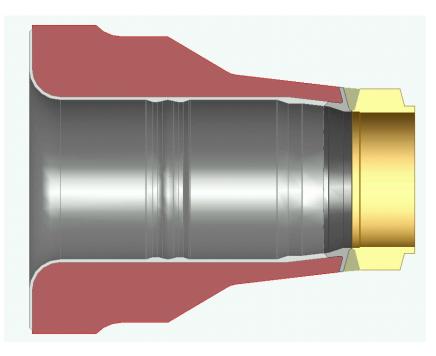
Pressurizer Surge Nozzle with Weld Overlay to Reduce Tensile Stress
